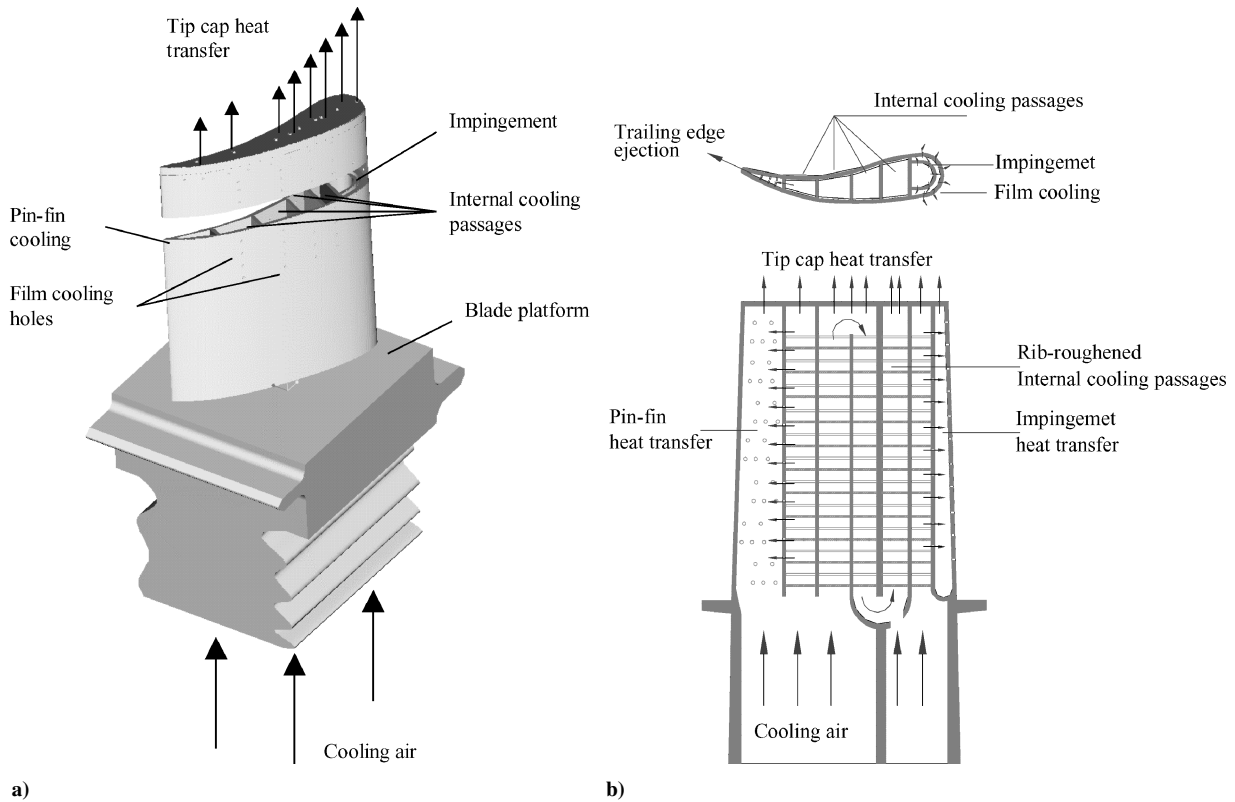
Three-dimensional view of turbine blade and platform showing a) cooling systems and b) internal cooling turbine-blade configuration.
